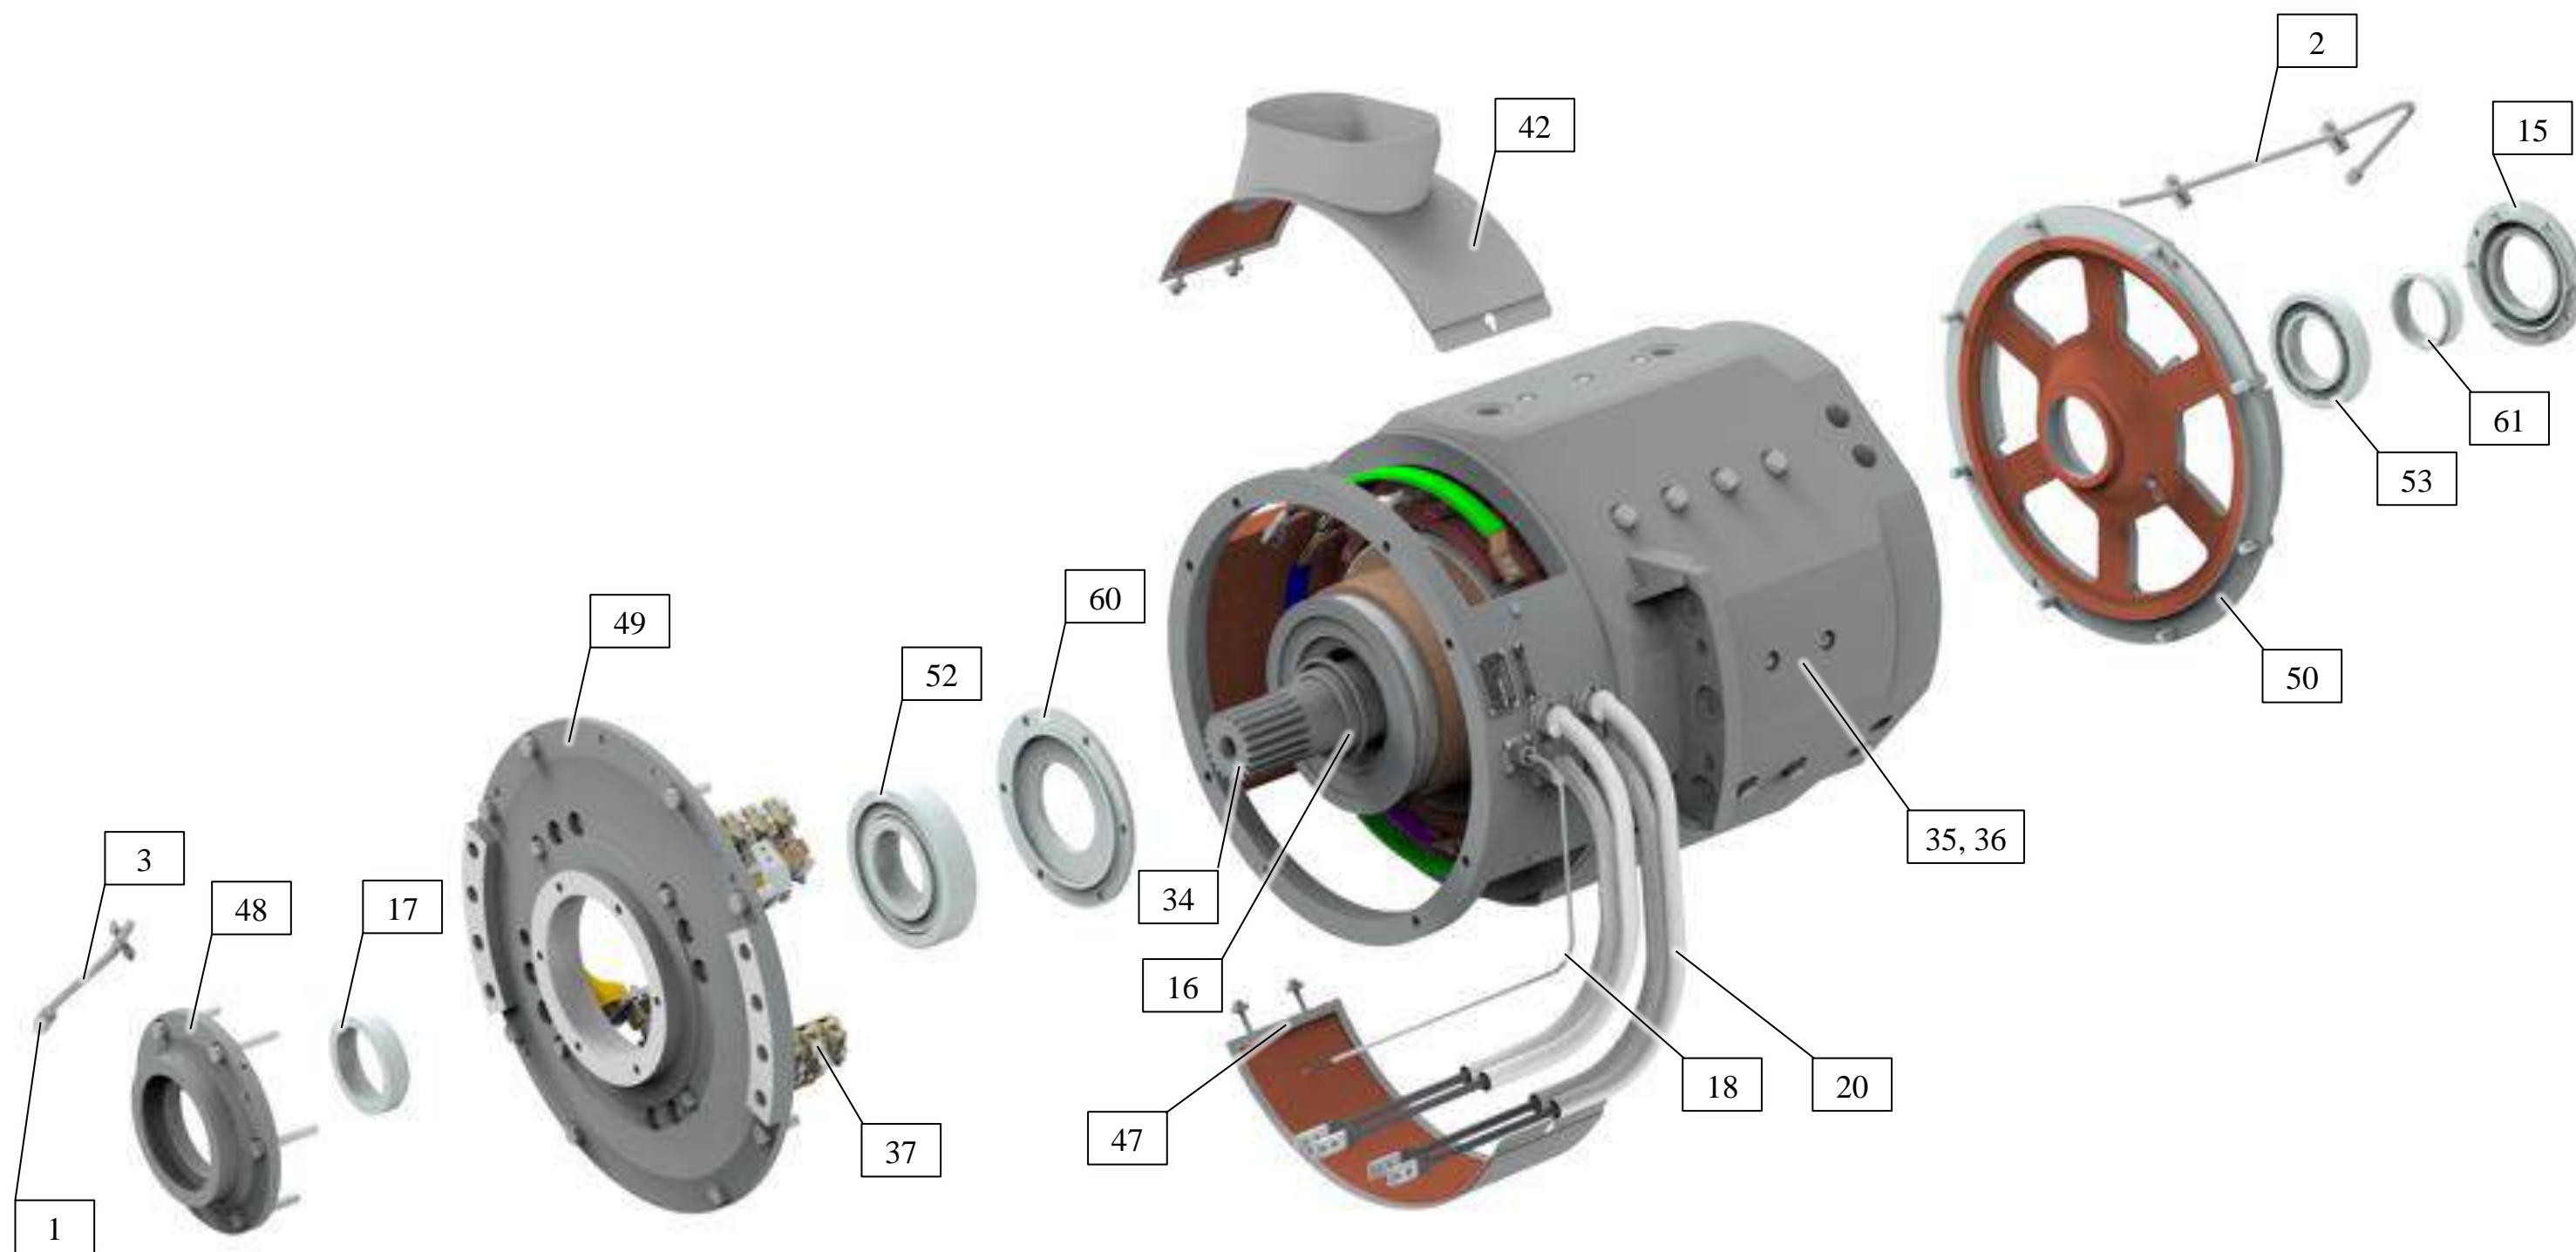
EDP-600 (EDP-600S) Electric Motor
